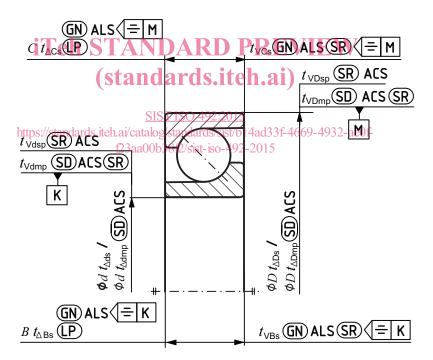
Size specification for single components for bearing with cylindrical bore and symmetrical rings
